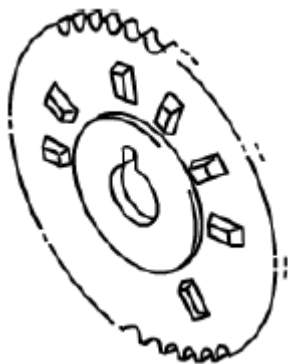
Identifying 1st Timing Chain Crankshaft Sprocket
